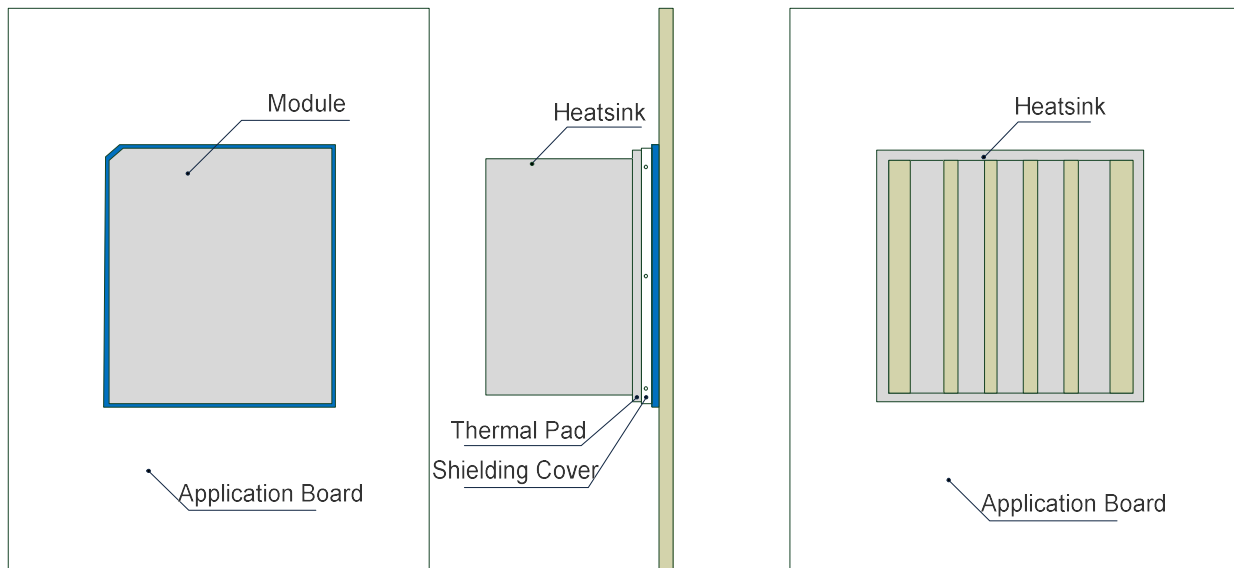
Referenced Heatsink Design (Heatsink at the Top of the Module)
